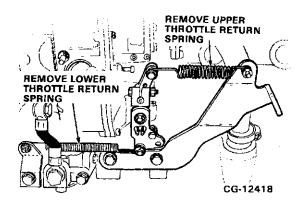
Remove Upper and Lower Throttle Return Springs (Current Production)
